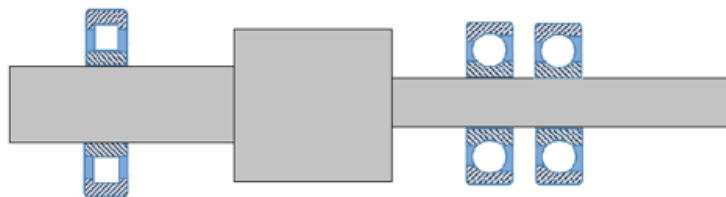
A simplified model of bearing shaft, with two angular contact bearings and a roller bearing
